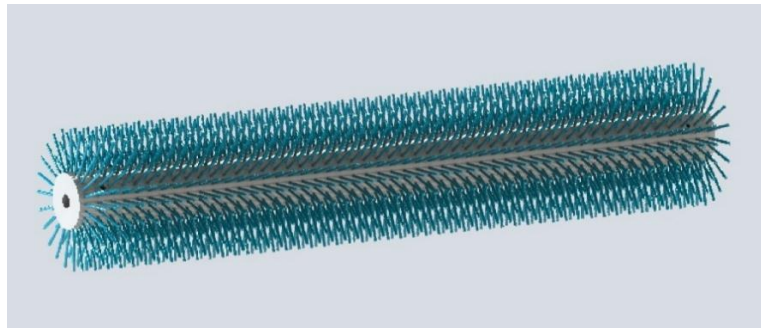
Cylindrical brush and spray-nozzle assembly (own design)
